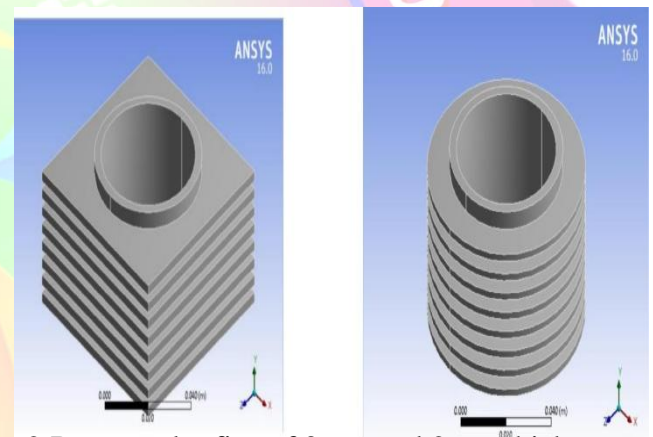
Rectangular fins of 3mm and 2mm thickness.
